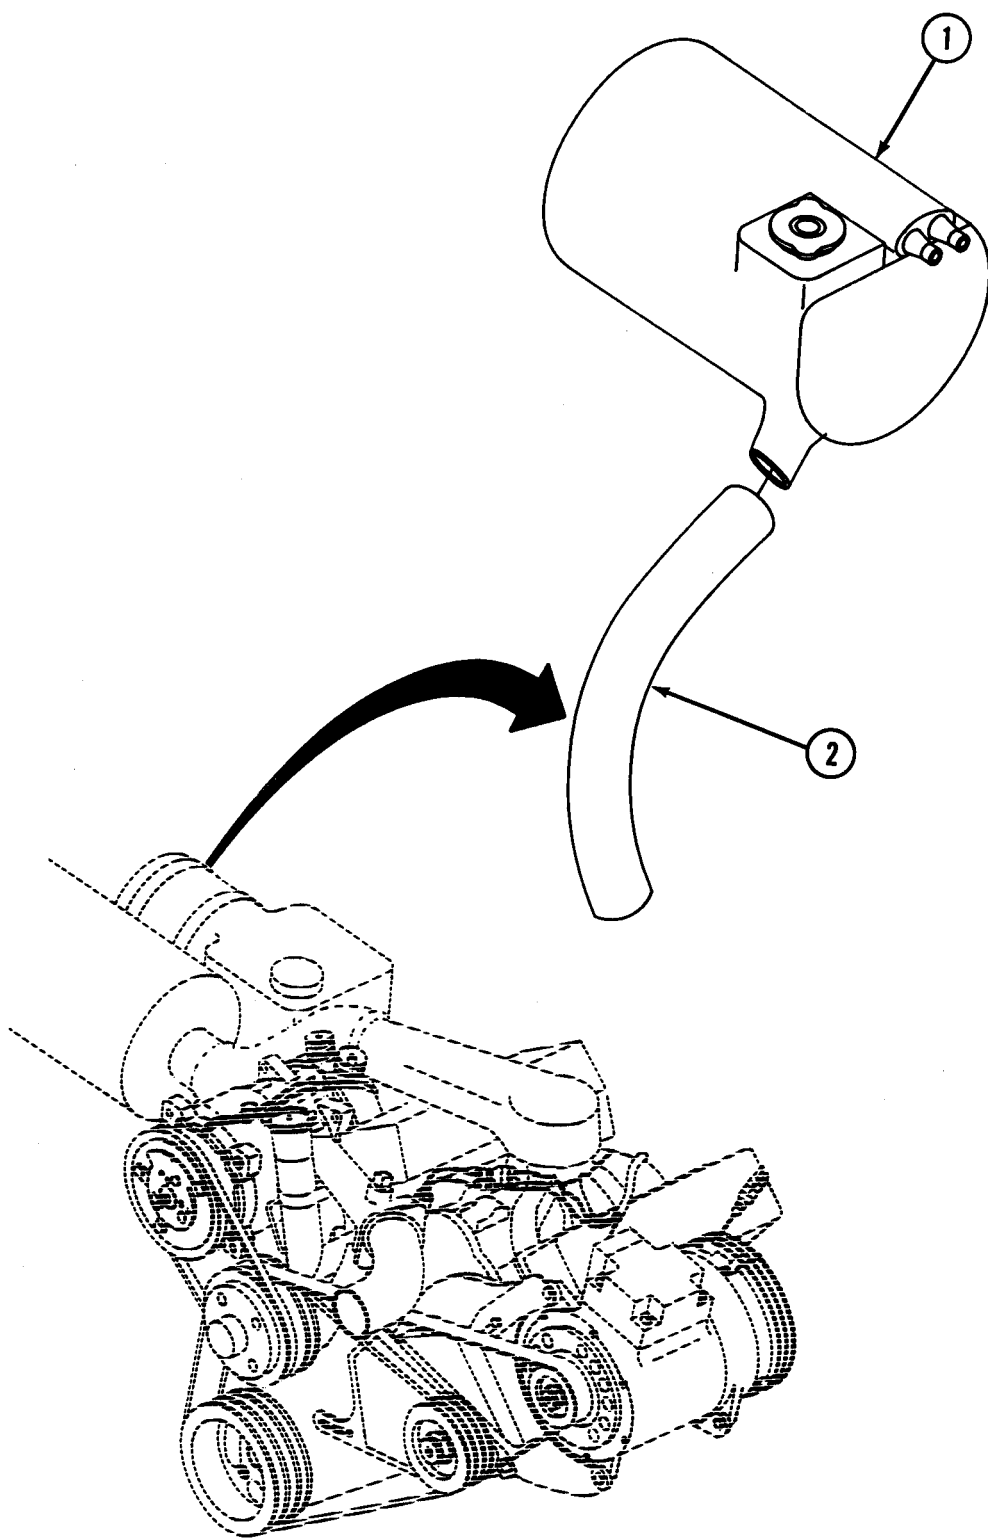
EES Kit, Surge Tank Assembly and Lower Radiator Hose
